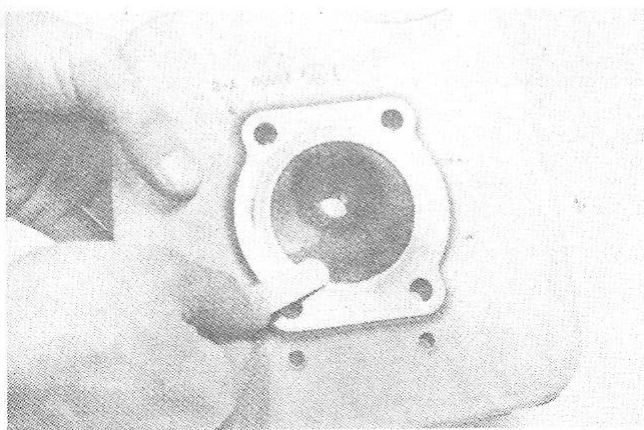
A.4 Use a blunt tool to scrape the carbon out of the combustion chamber and be very careful not to damage the gasket surface (Sec 7)
